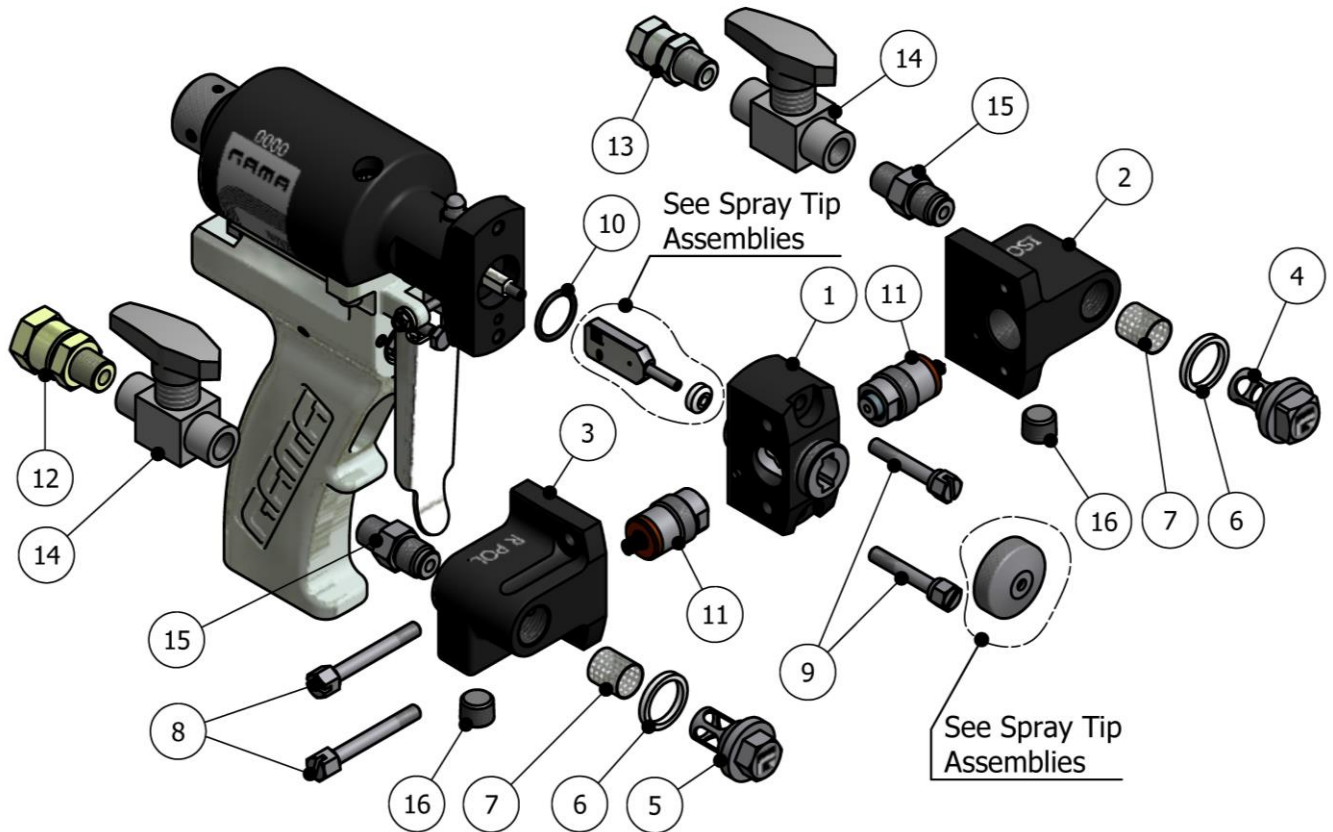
(OPTIONAL) Final Assembly, Exploded View
